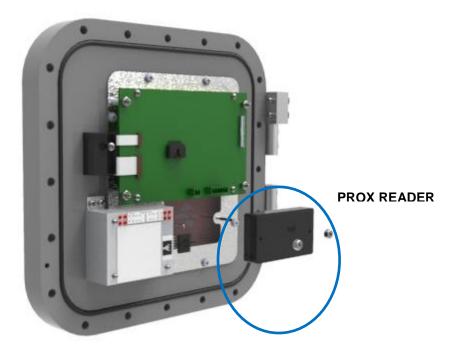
ML II/ RCU II EXL Cover Assembly Prox Bracket Mount
